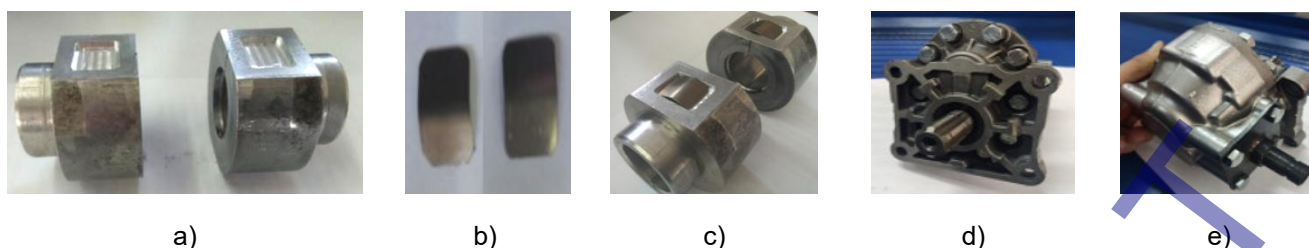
Support bushings of the gear pump with a biaxial connection of the second version: a) support bushings with a machined groove; b) elastic expanding elements; c) assembled support bushings d), e) assembled gear pump with a biaxial connection
